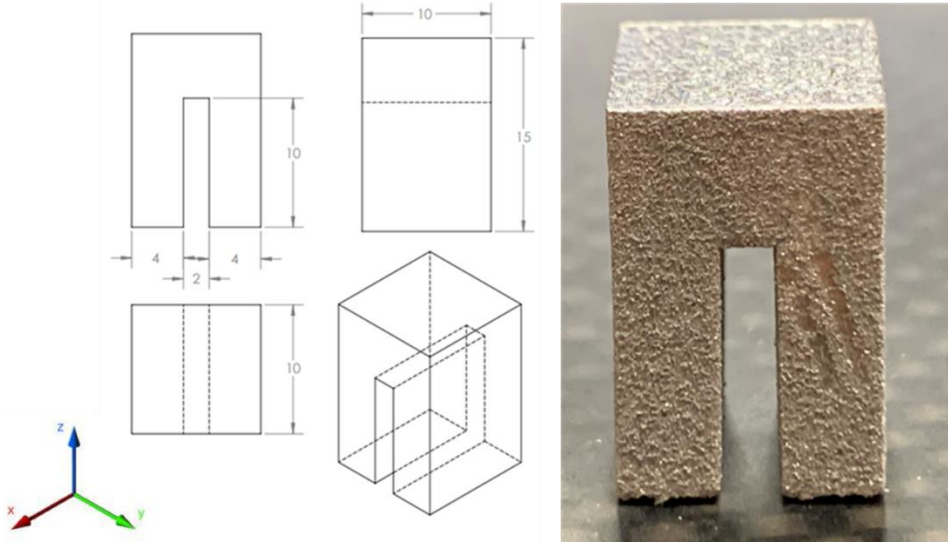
Overhang test piece design and dimensions (in millimetres), along with the printed Ti-6Al-4V alloy part. The print direction is parallel with the z-axis.
